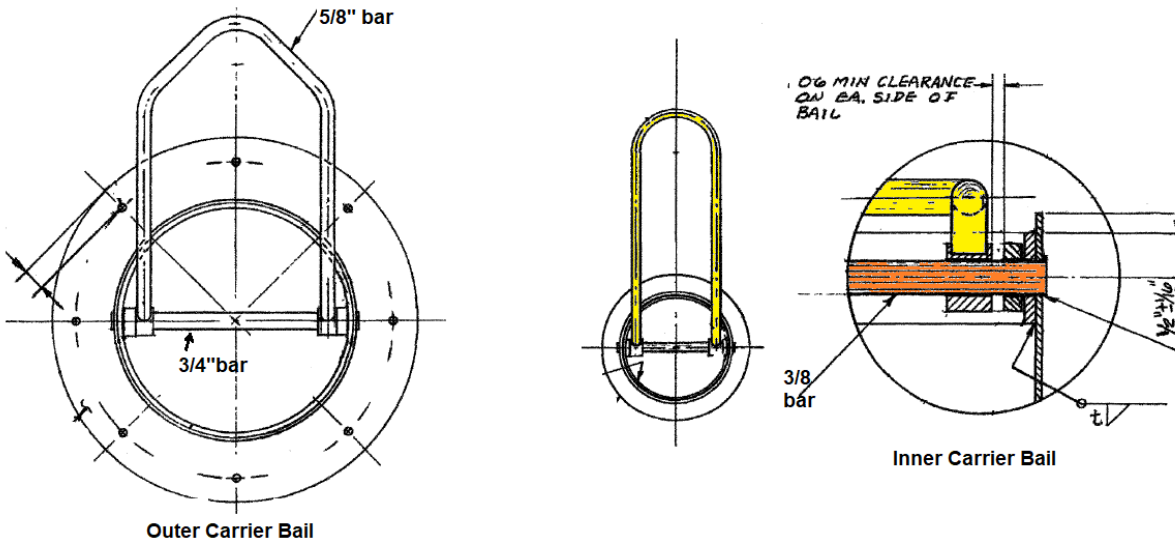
Plan view of Bail and Carrier, Showing attachment Joint Details
